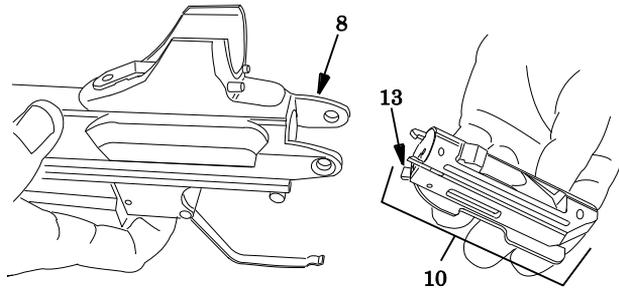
Installing Bolt/Bolt Carrier Assembly.
